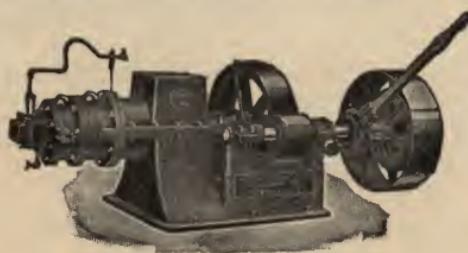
,807.—International auger machine, for use in connection with a pug mill. In operation, the auger of the machine forces the tempered clay through the die and discharges a solid bar of clay.
